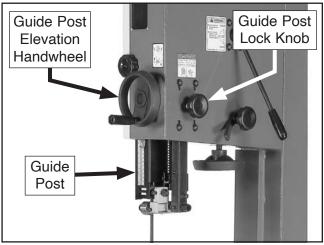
Location of guide post, elevation handwheel, and lock knob.
